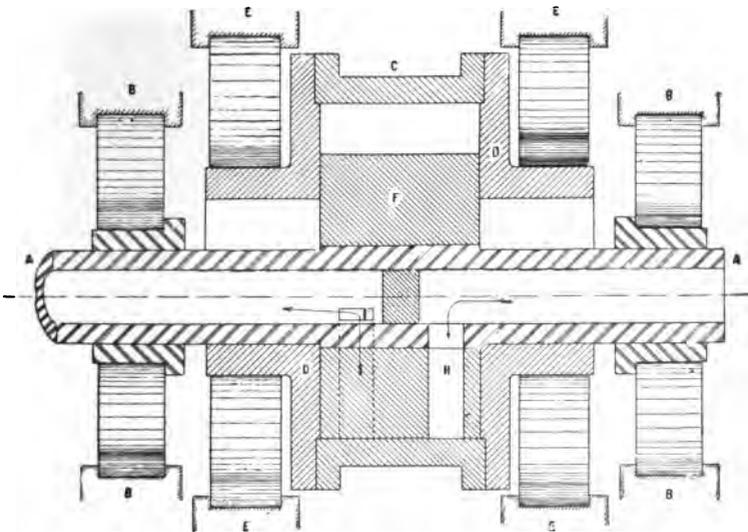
FRONT SECTIONAL VIEW OF THE “HULT” ROTARY ENGINE.
